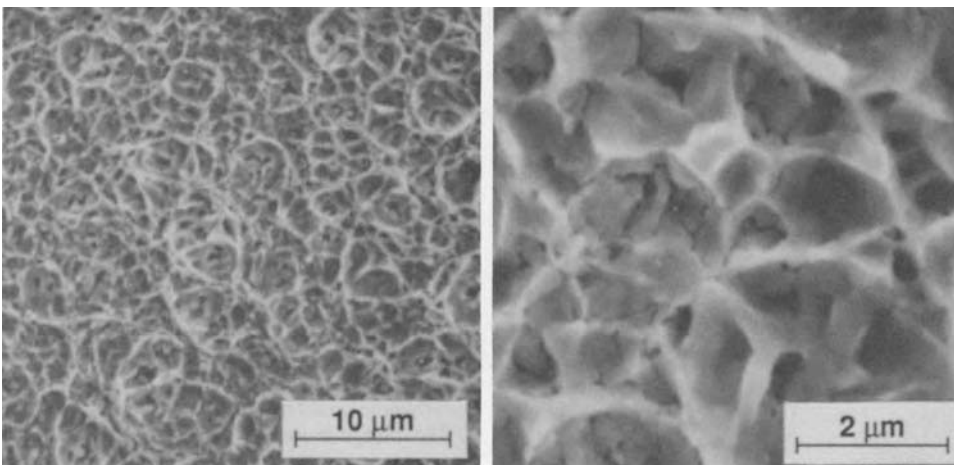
Solid-state-welded silver interlayer fracture surface between lapped maraging steel base metals
